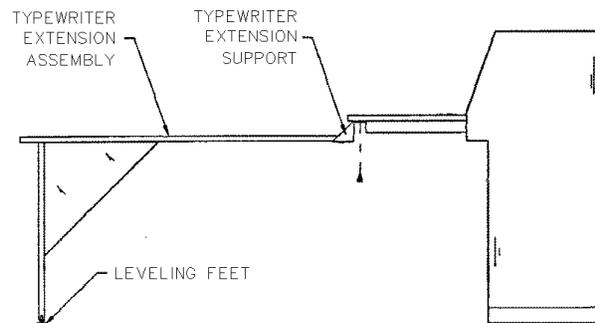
TYPEWRITER EXTENSION ASSEMBLY
